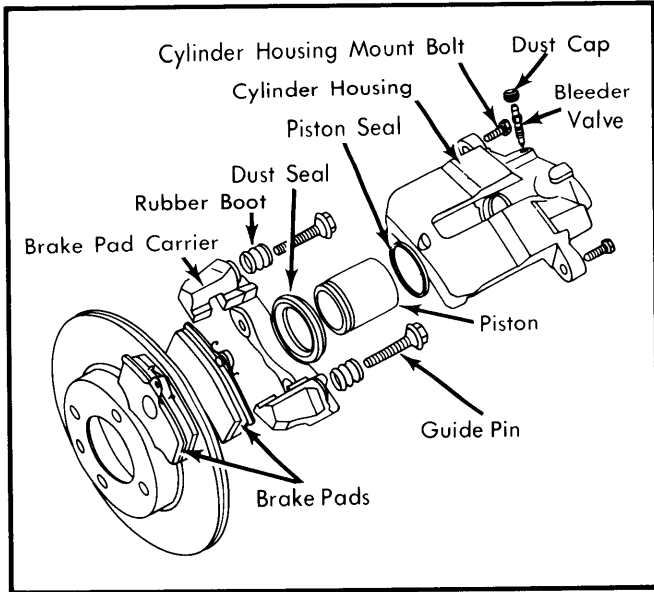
Audi Fox Disc Brake Caliper Assy.
